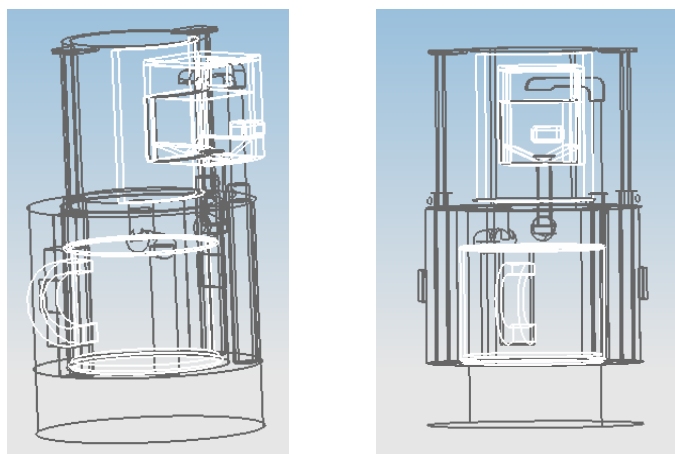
Wire Frame CAD Drawings of Selected Concept #2
